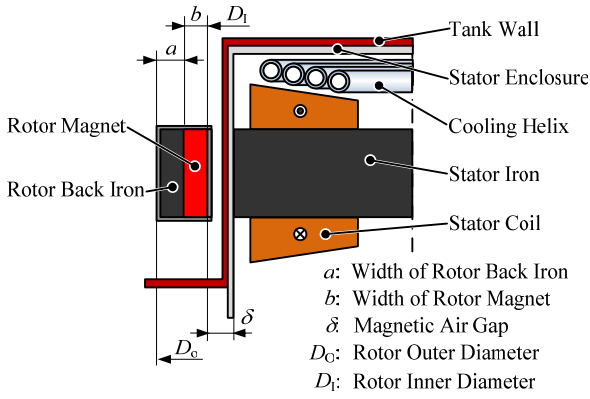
Schematic view of the build-up of the bearingless motor with exterior rotor.
